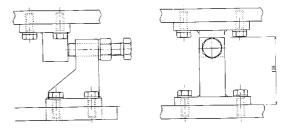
Positioning equipment of magnet girder for longitudinal direction.
